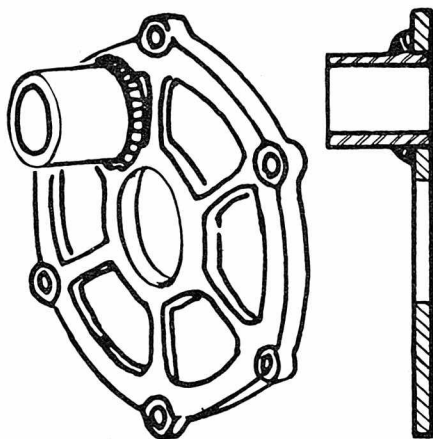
View of rotary valve cover showing method of installing tube for larger carburetor. Outside diameter of tube must fit carburetor and inside diameter of tube should match carburetor bore.
